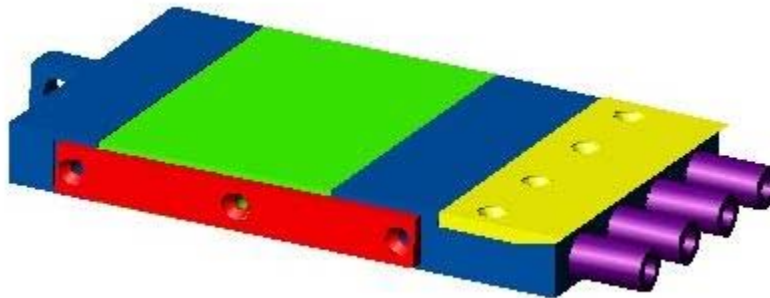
Cross-sectional view of Extrusion Housing and Die Openings
